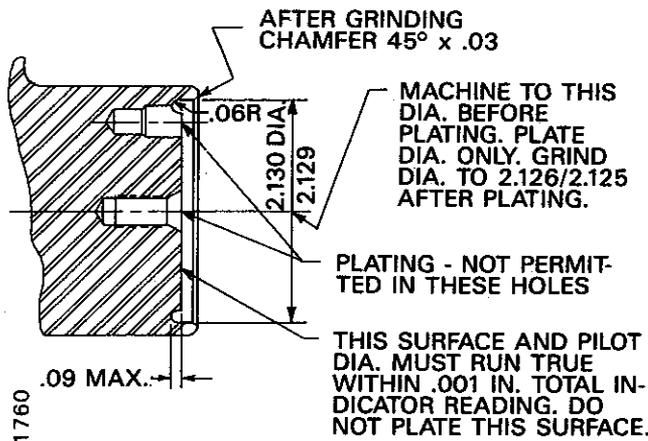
A. Details for Repairing Pilot Diameter of Crankshaft
